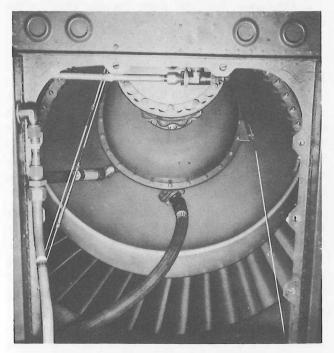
38. Hydro-Mechanical Clutch and Fan Assembly Installed
